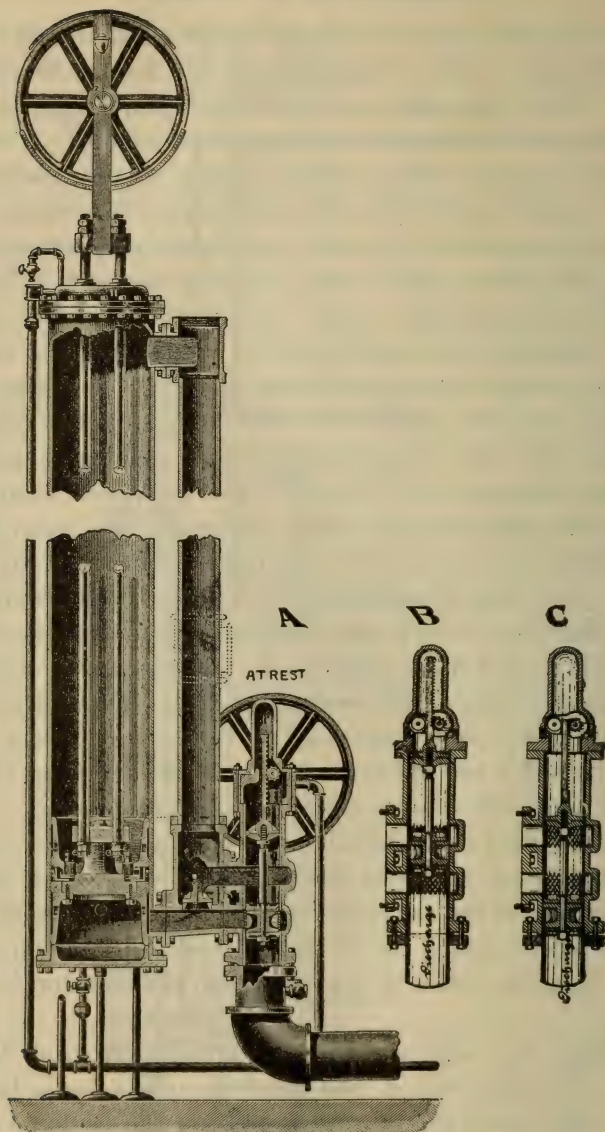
Otis vertical hydraulic passenger and freight machine.
